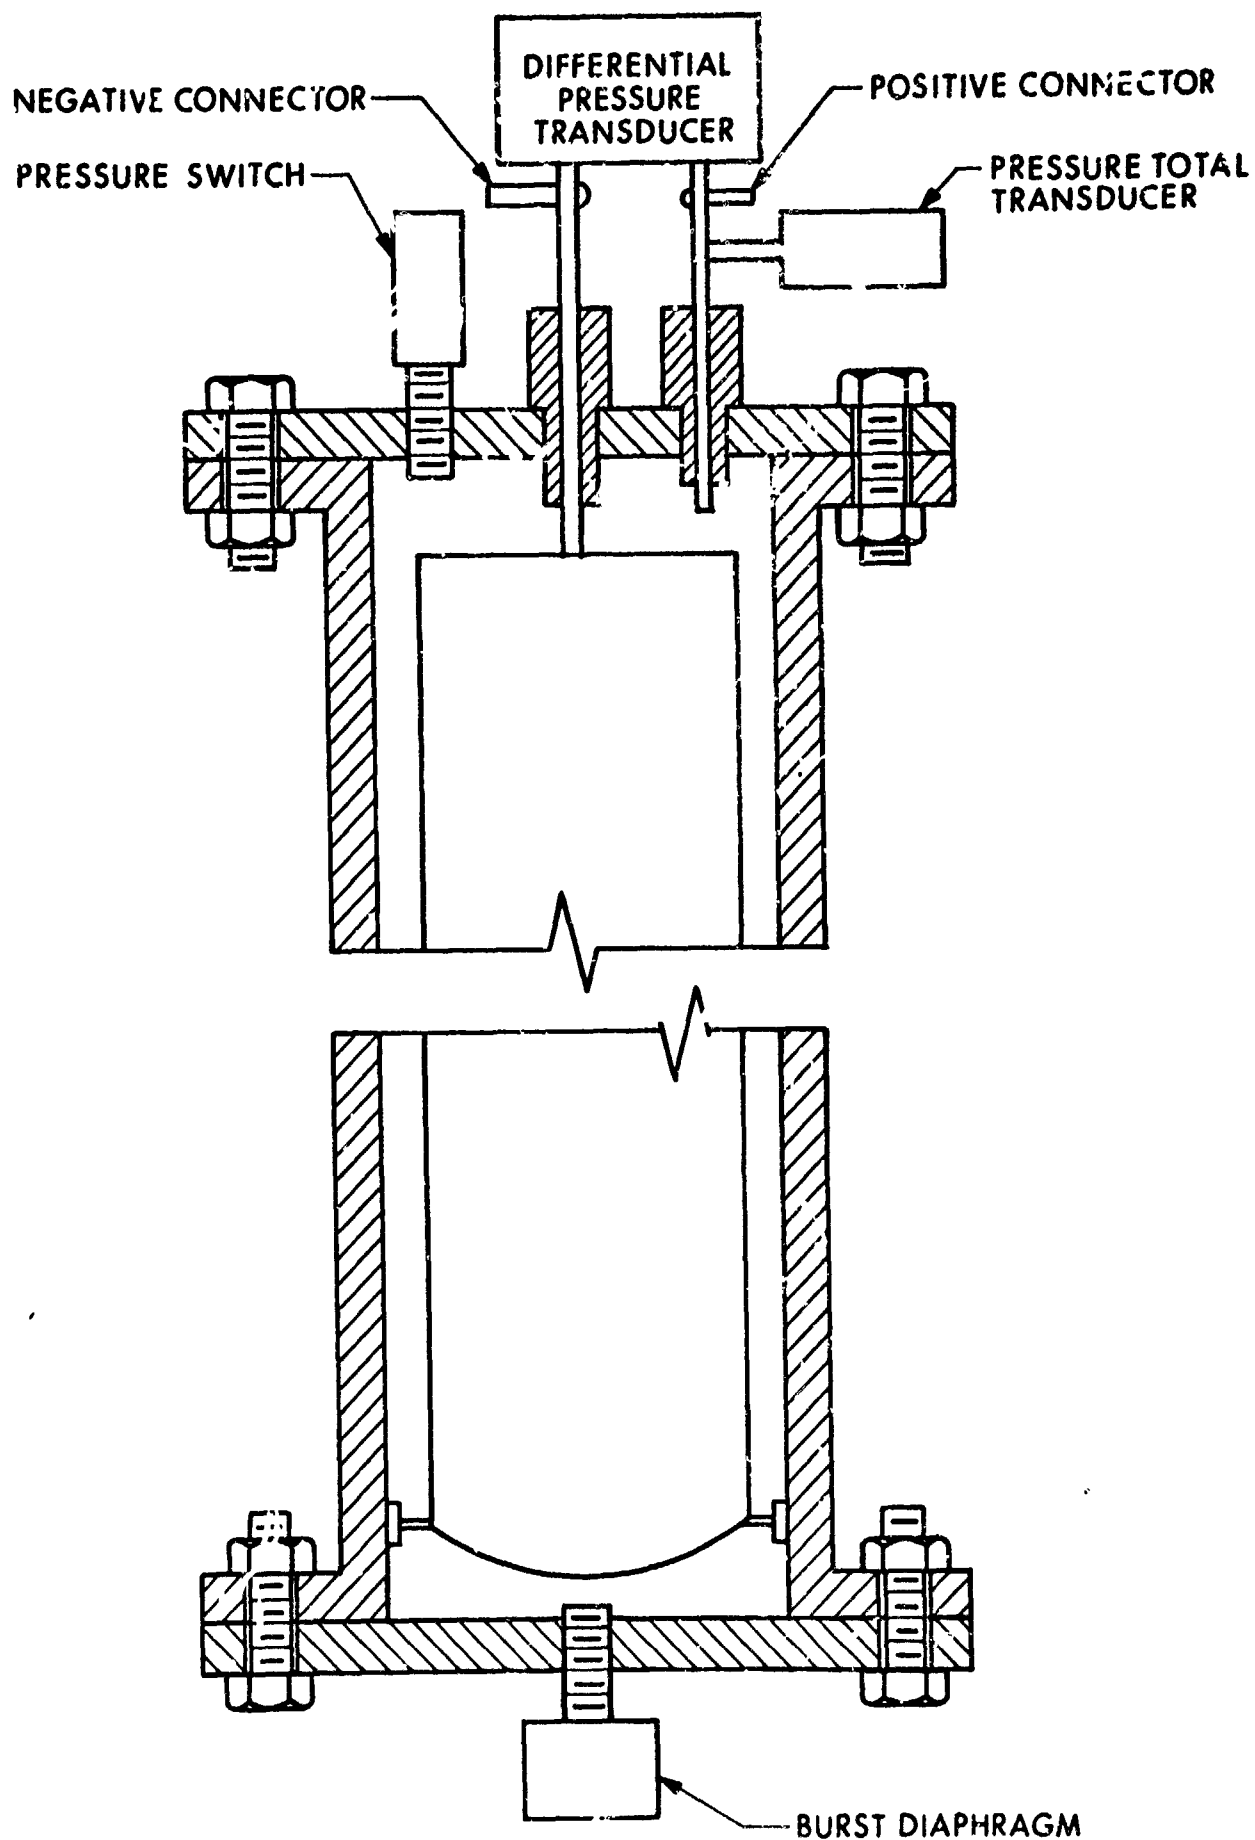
EXTERNAL COMPONENT ASSEMBLY
